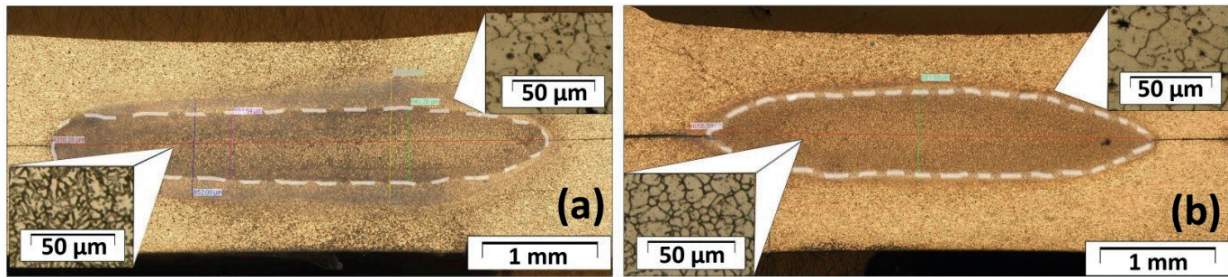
Section of welding nugget produced by 25.3 kA welding current, 6 cycles welding time, and (a) 5, (b) 20 mm weld spacing (magnifications: macrostructure 25 x, microstructures 500 x; dashed curve is the approximate border of nugget and HAZ)
